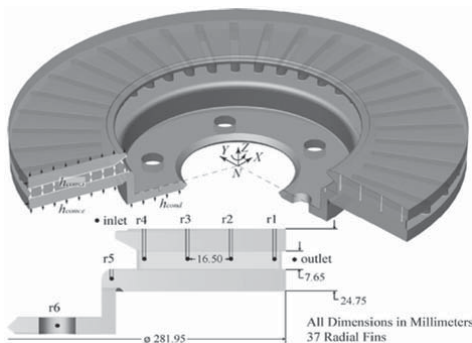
Brake rotor geometry and thermocouple placement [62].
